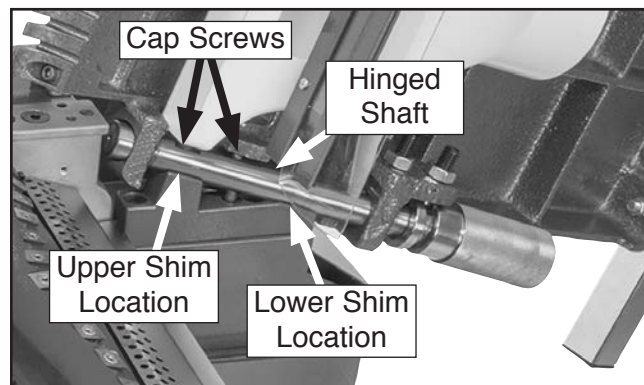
Infeed table hinged shaft. (Jointer table raised for clarity.)
